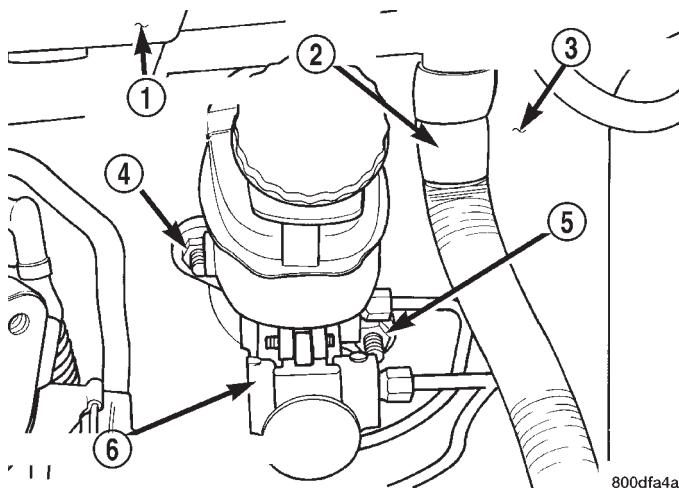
Master Cylinder Attachment To Vacuum Booster
